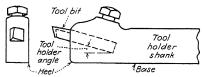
Cutting-tool nomenclature. (Mechanical Engineering.)
